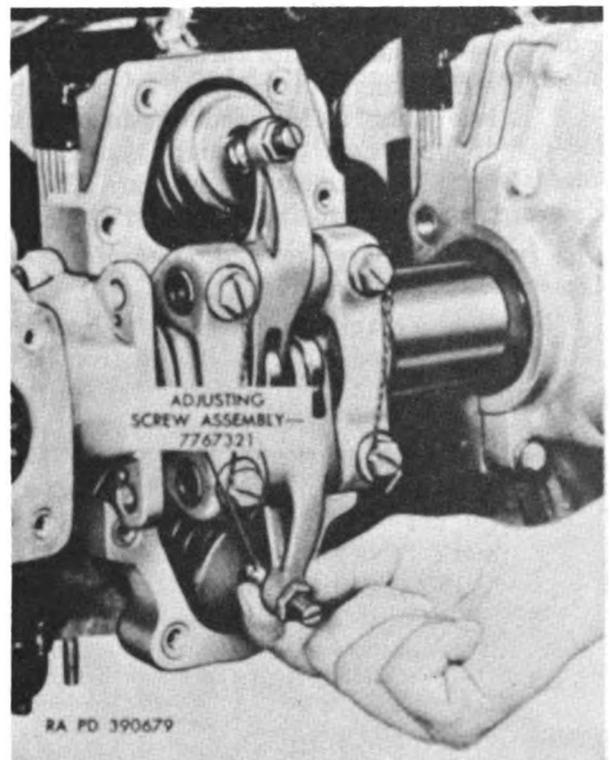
Determining closing point of No. 1 cylinder intake valve.
